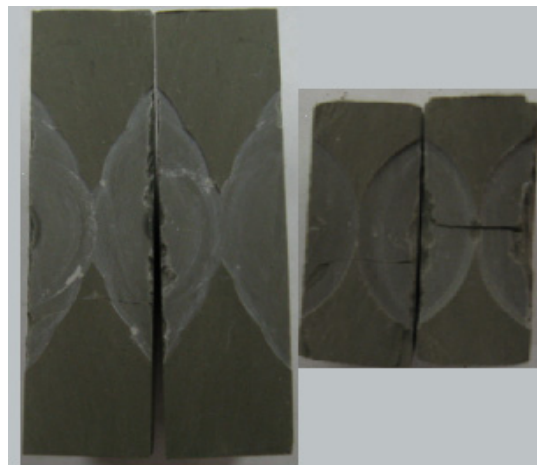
Both large and small samples show well defined fracture surfaces
